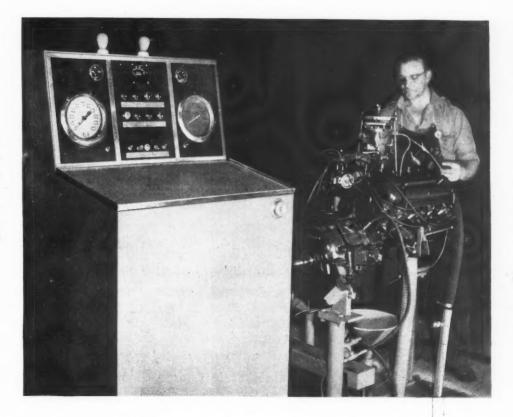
Completed V-8 Type Engines are Given a Water-brake Dynamometer Test on This Machine. Engine Speed and Torque are Shown on the Dial Indicators
